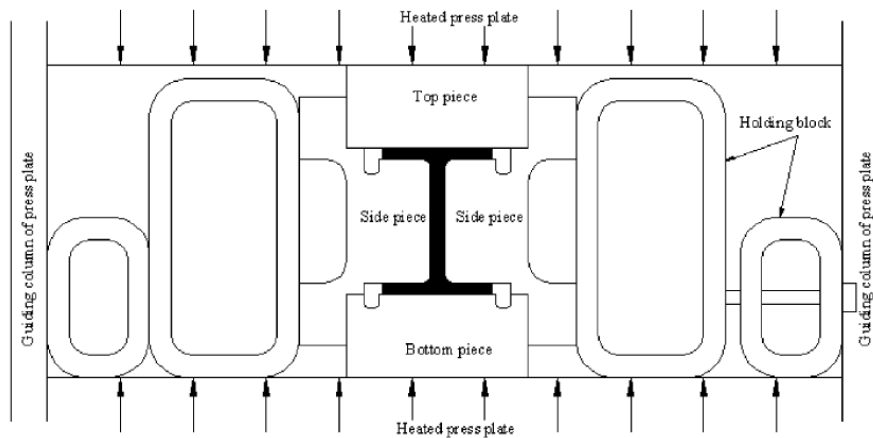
The schematic of the assembled 4 piece I-beam mold in the hot press.⁸
